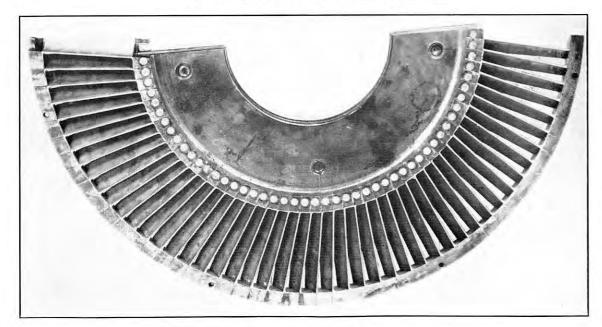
HALF DIAPHRAGM OF TURBINE.
